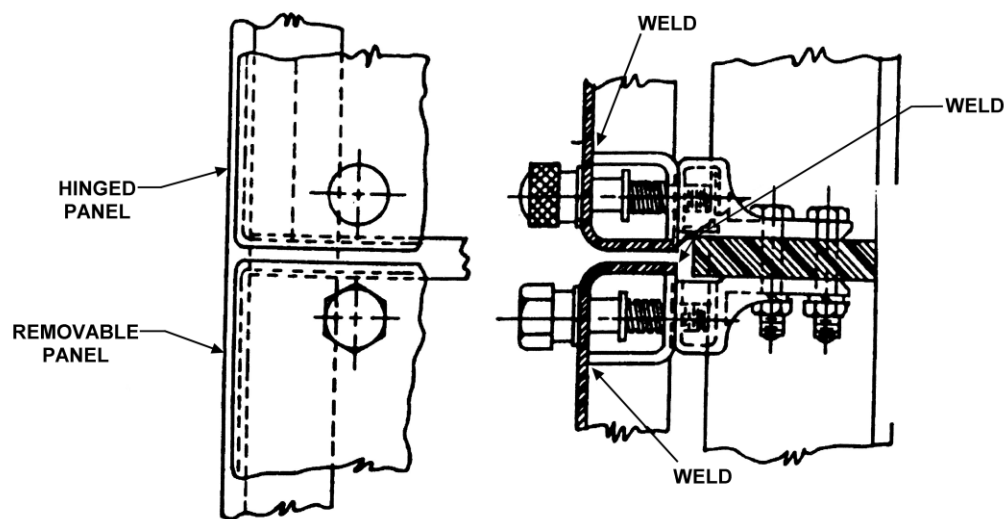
Typical panel latch bolt for hinged and removable panel.
